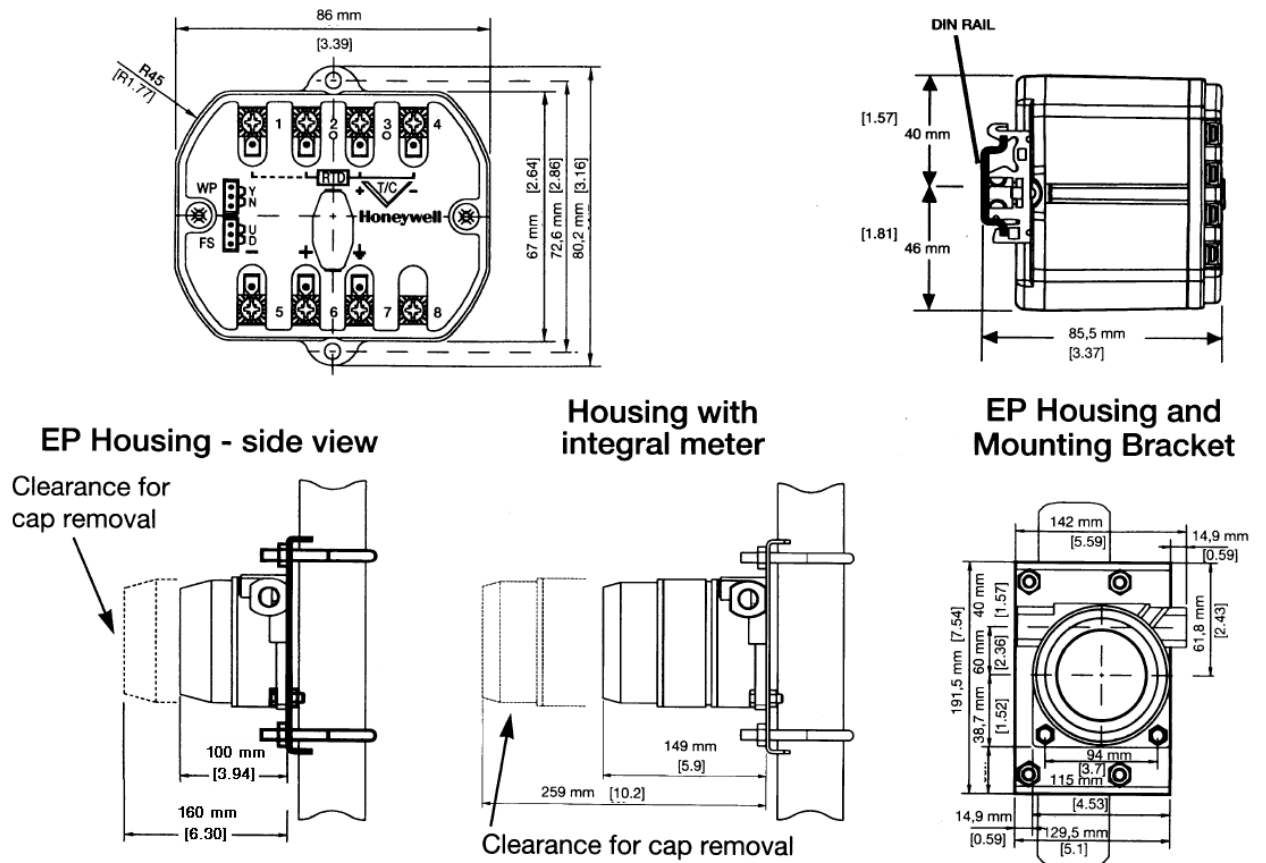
STT350 Transmitter and Optional Flameproof Housing Dimensions –reference only – mm (inches)
